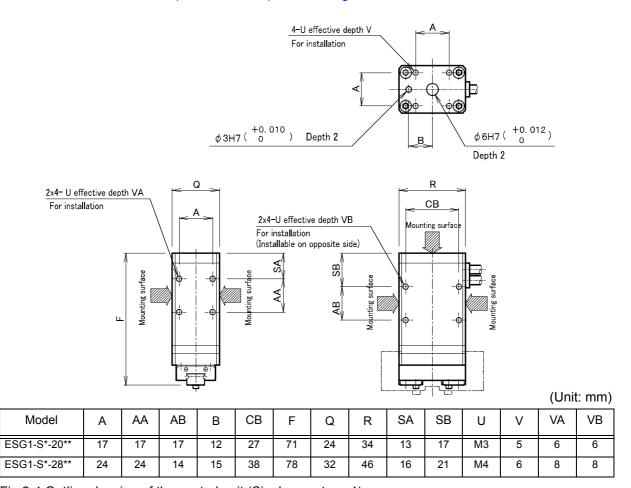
Outline drawing of the control unit (Single cam type 1)
